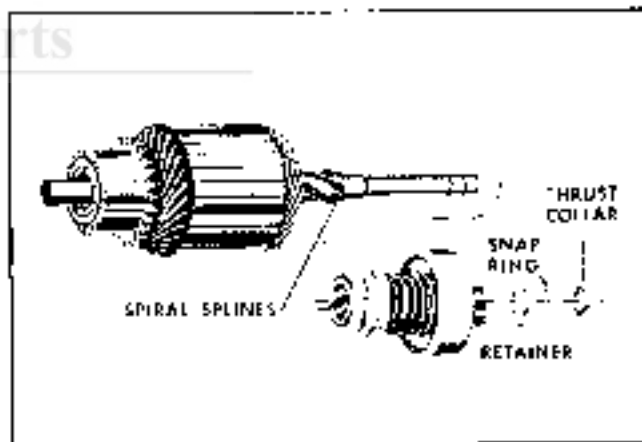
E-1 Amature and Overrunning Clutch Assembly
